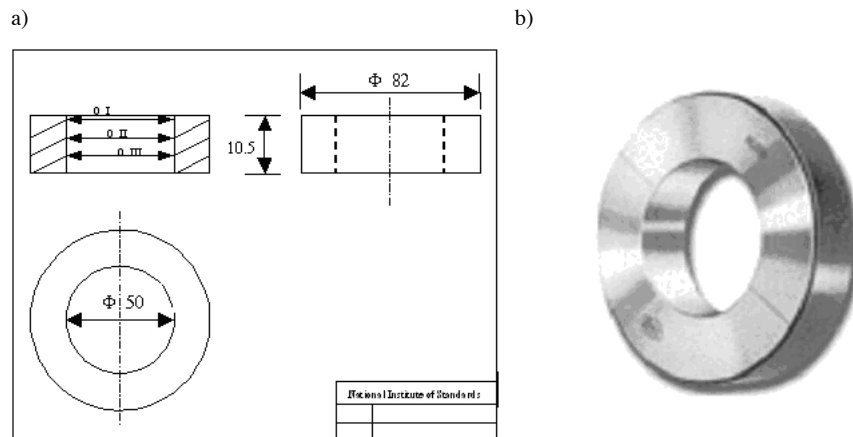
The tested standard ring block: a. A simple drawing of the cylinder, b. The selected steel ring.
